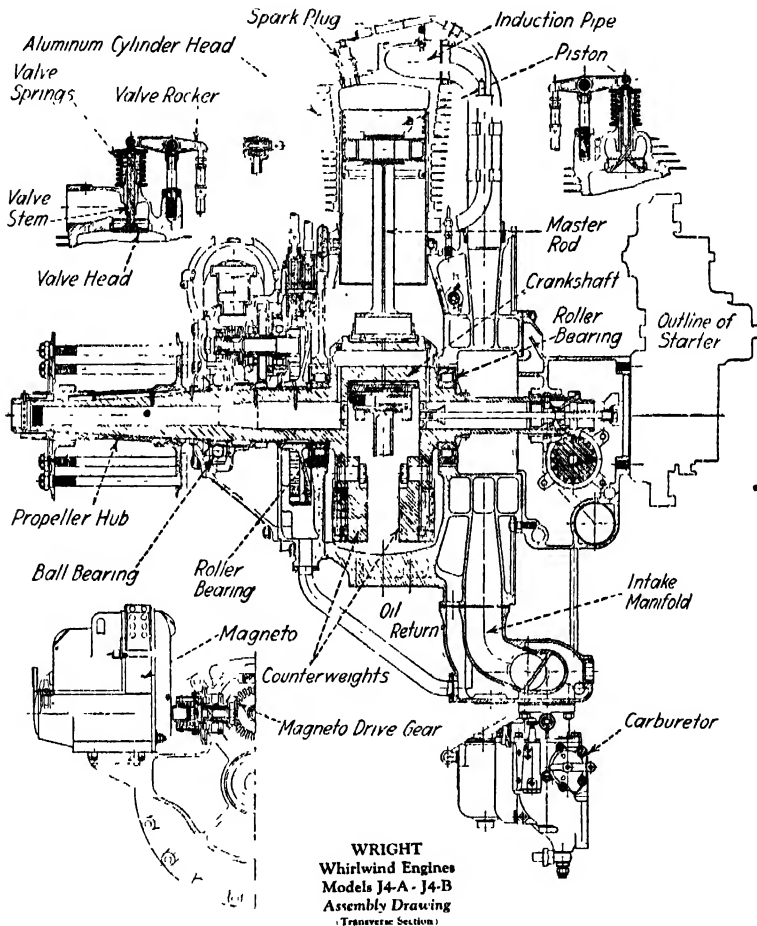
Transverse Section Assembly Drawing of Wright "Whirlwind" Engines, Models J 4 A and J 4 B.
